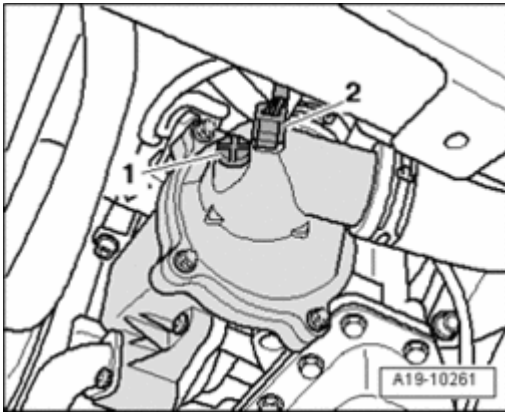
Removing/Installing Drain Plug On Map Controlled Engine Cooling Thermostat F265
